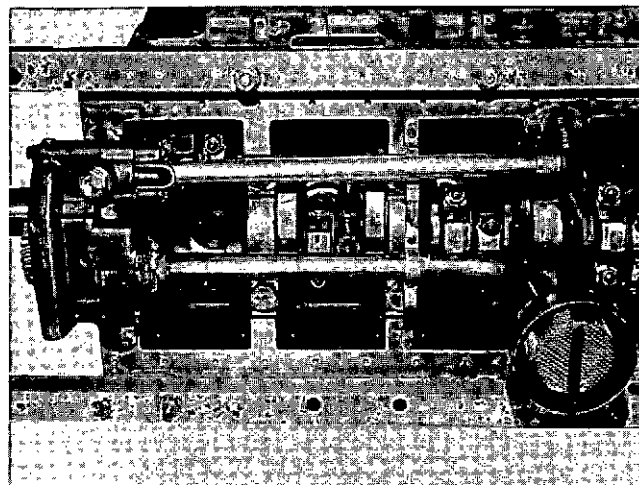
, V414129. Lubricating oil pump, clamps and connections in position
